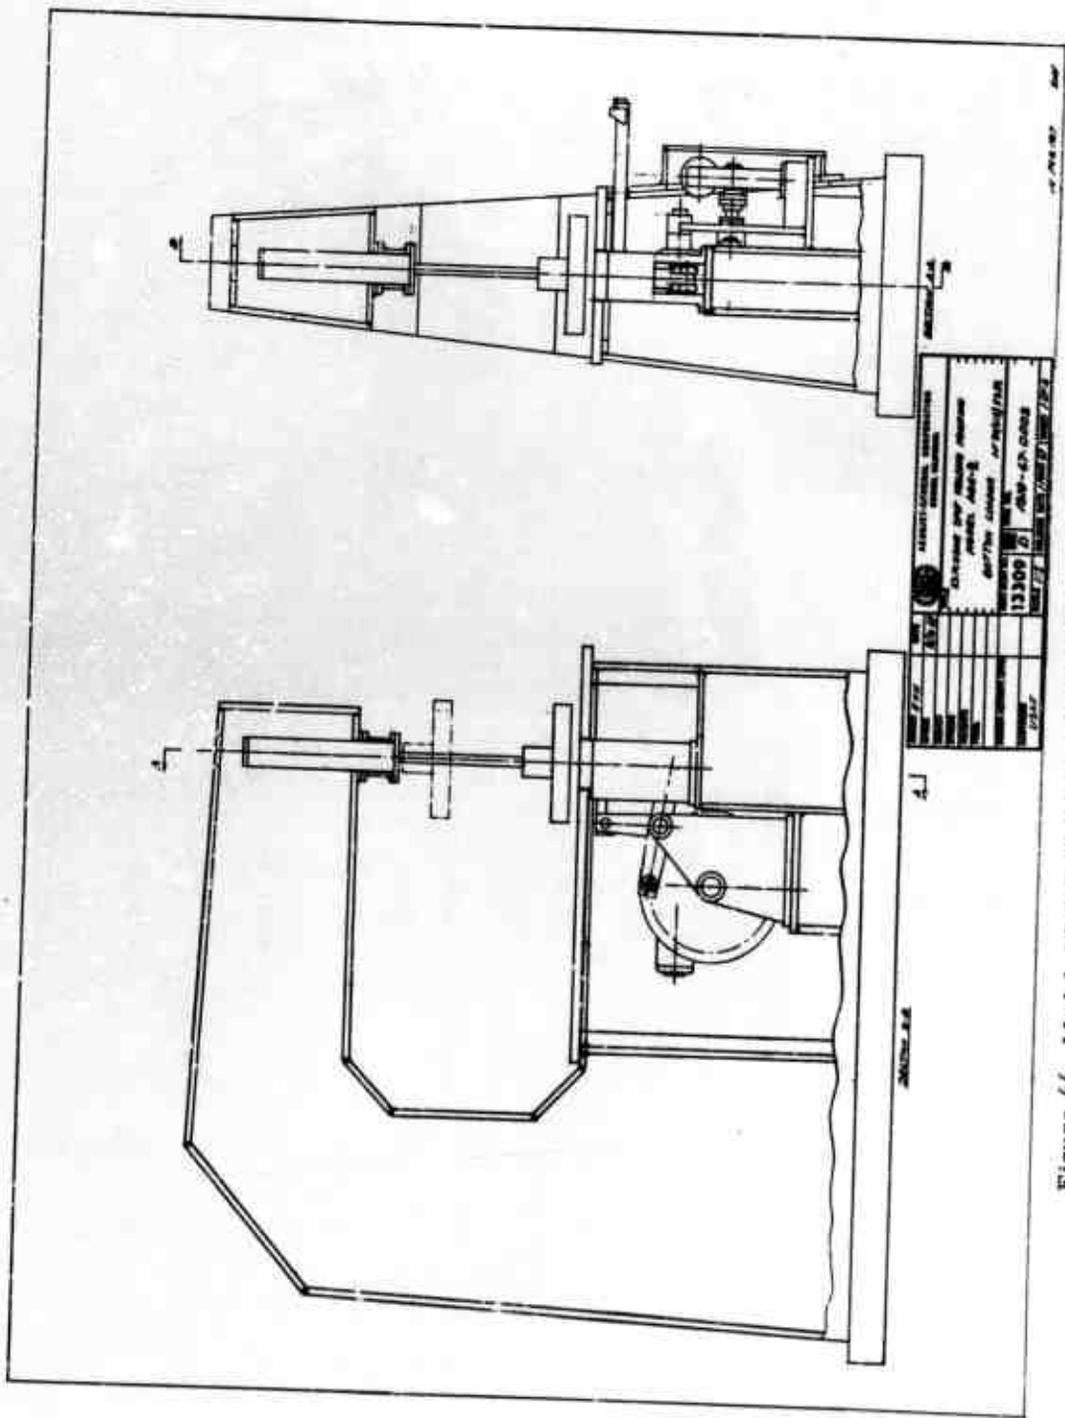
Model AGC-2 Explosive Spot Welding Machine (Sheet 1 of 4).
